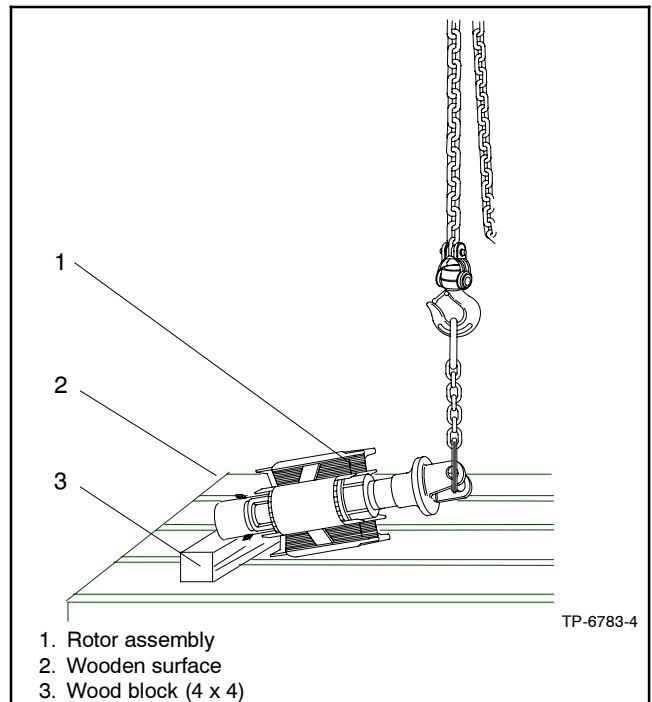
Alternator Support, Drive Disc, and Fan Removal
